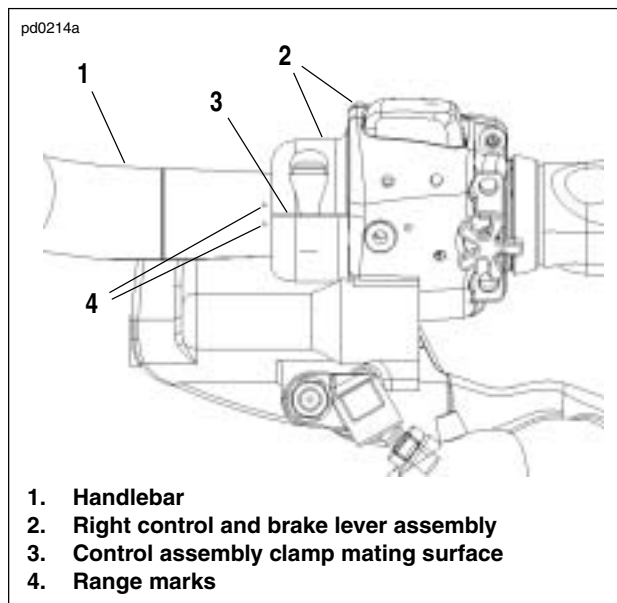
Right Handlebar Control Assembly (Bottom View)
